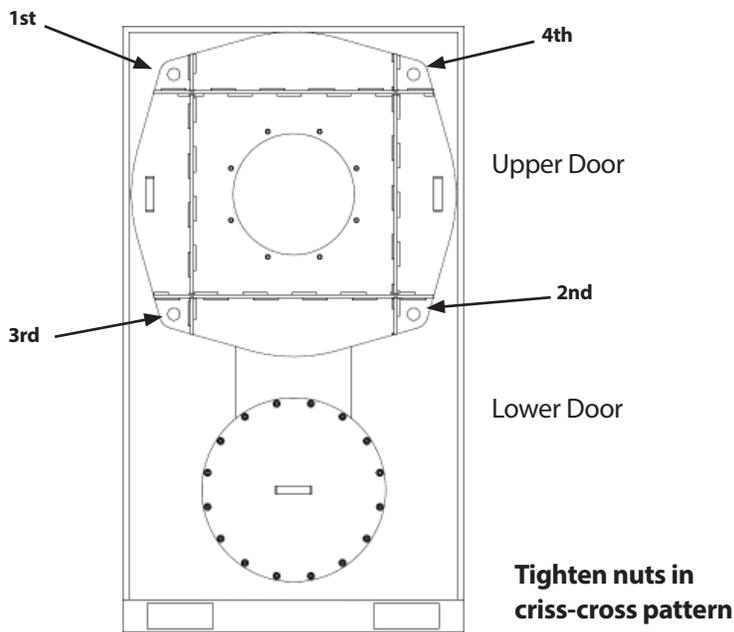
A - VERIFYING TORQUE SETTINGS (FRONT VIEW, PANELS REMOVED)
